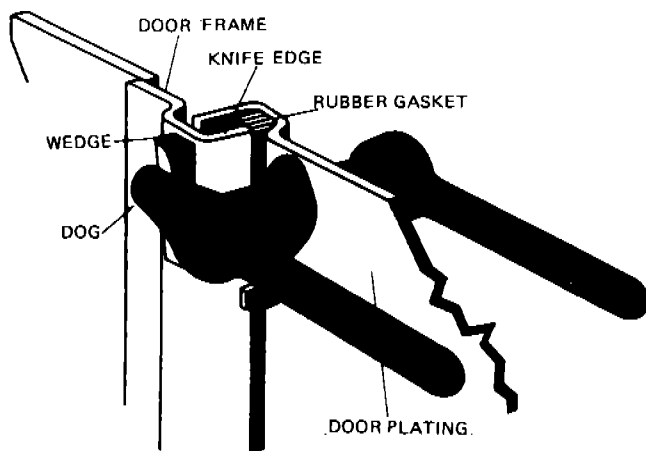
This cutaway section of a watertight door shows how the knife edge presses against the rubber gasket for a tight seal.
